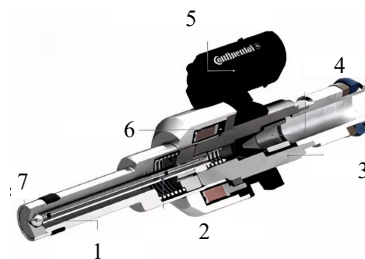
Schematic view of a direct injection (DI) engine: 1 – injector tip; 2 – piston; 3 – injector shell; 4 – fuel delivery system; 5 – wire connector; 6 – power transmission system; 7 – atomizer
